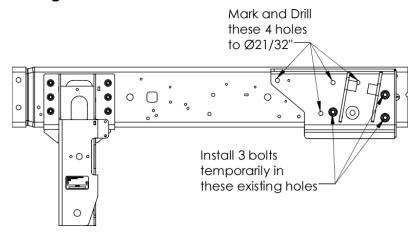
Driver side template location for upper strut mount frame drilling -DS120F53 & DS150F53
